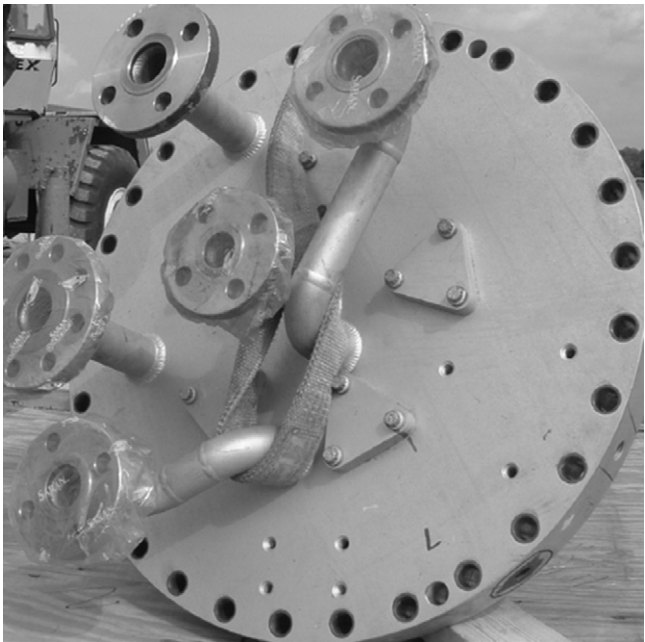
DLN fuel nozzles mounted on the cover of the combustor.
